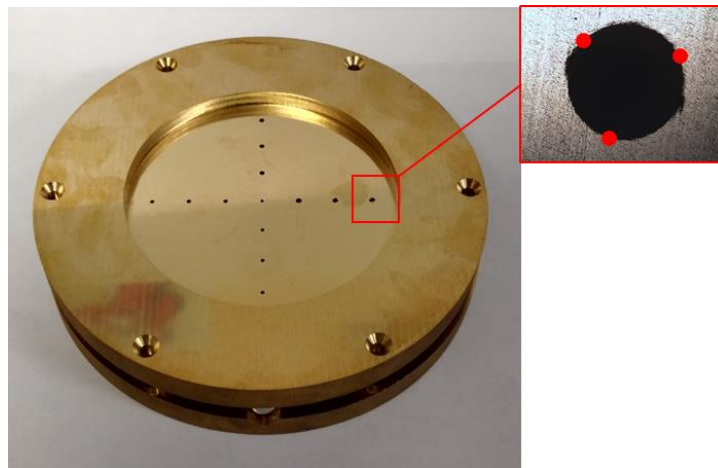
Inverted assembly of the coupled primary and complementary mold inserts show the milled pocket.
